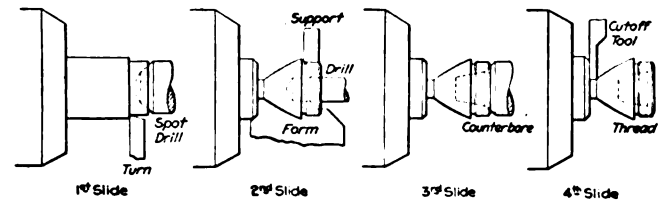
OPERATION 1: POINTS—FORM AND THREAD
